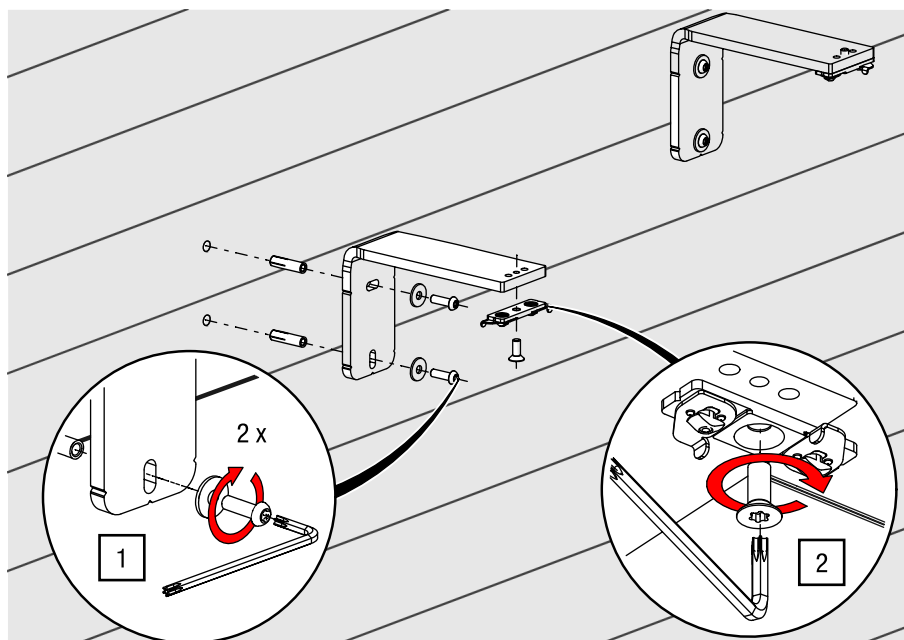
Wall mounting Interior wall mount bracket – Attach wall mount bracket and screw ceiling mount bracket tight
